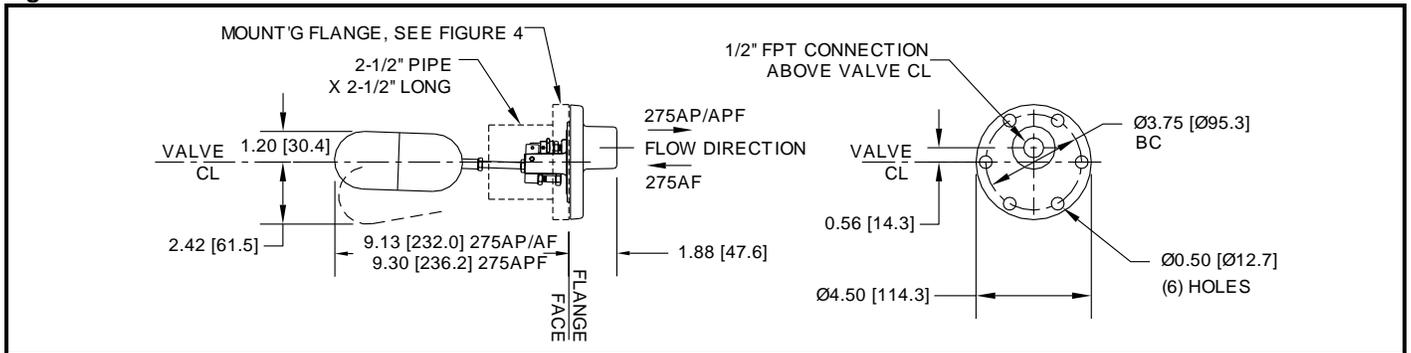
275AP/APF/AF Valve with Cast Iron Chamber
